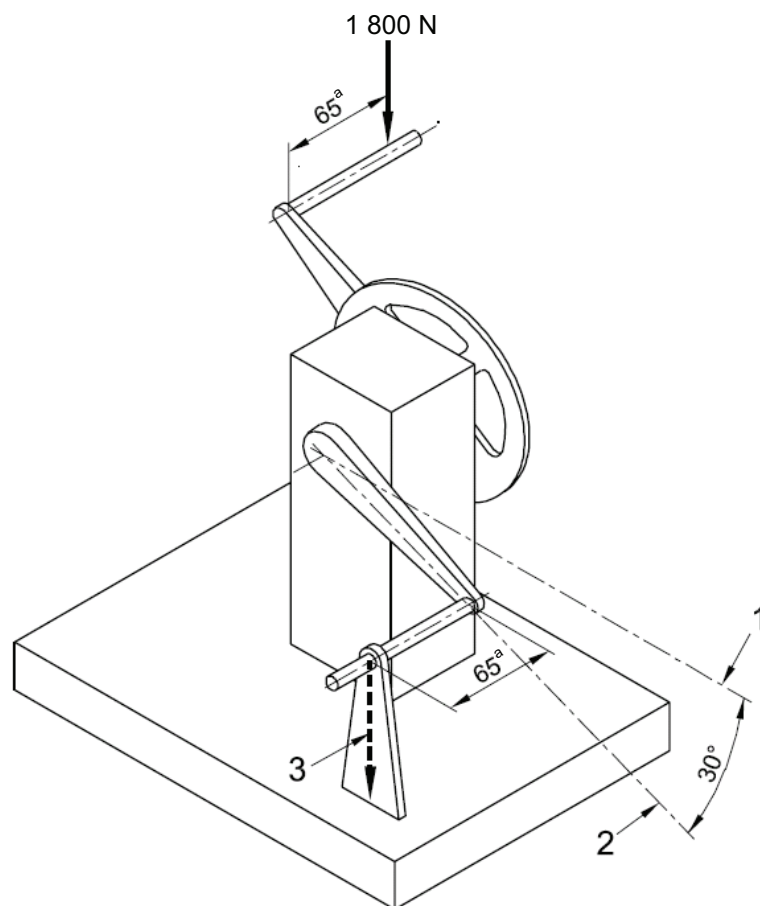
Crank assembly — Fatigue test with cranks at 45° (typical test arrangement)
